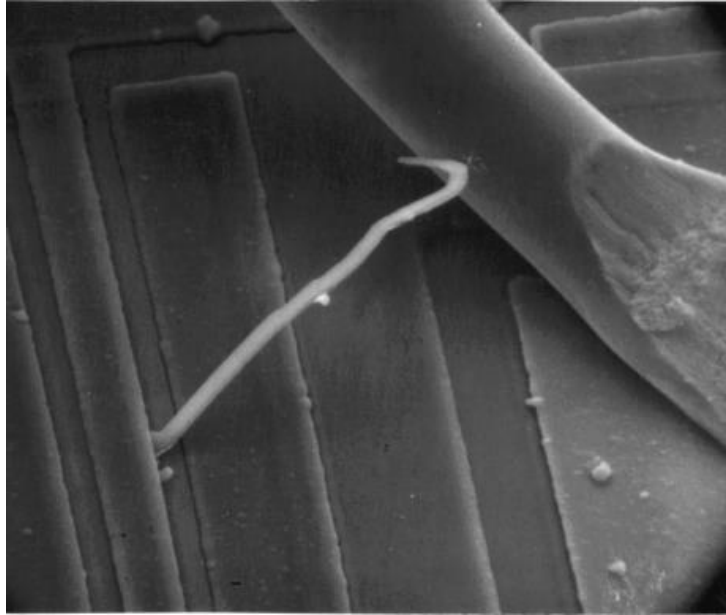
Extrusion to a bond wire causing a short circuit [46].
